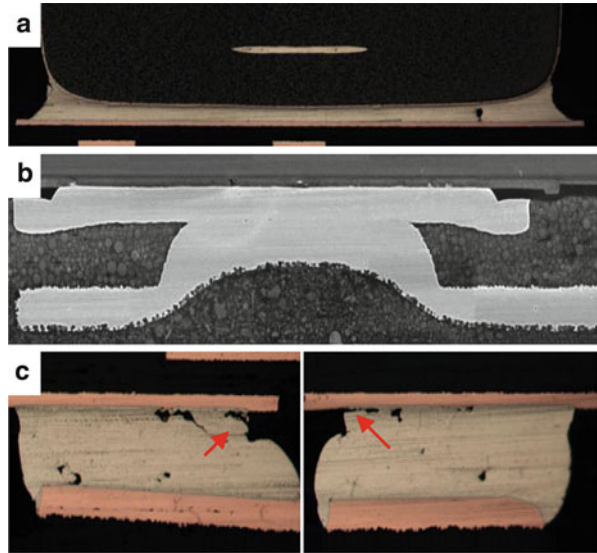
Cross sections of the drop failed 7×7 daisy chain modules. *Top*: component failed at 610 drops on JEDEC drop test PCB; *bottom*: component failed at 731 drops on JEDEC board. *Arrows* highlight the solder joint crack initiations
